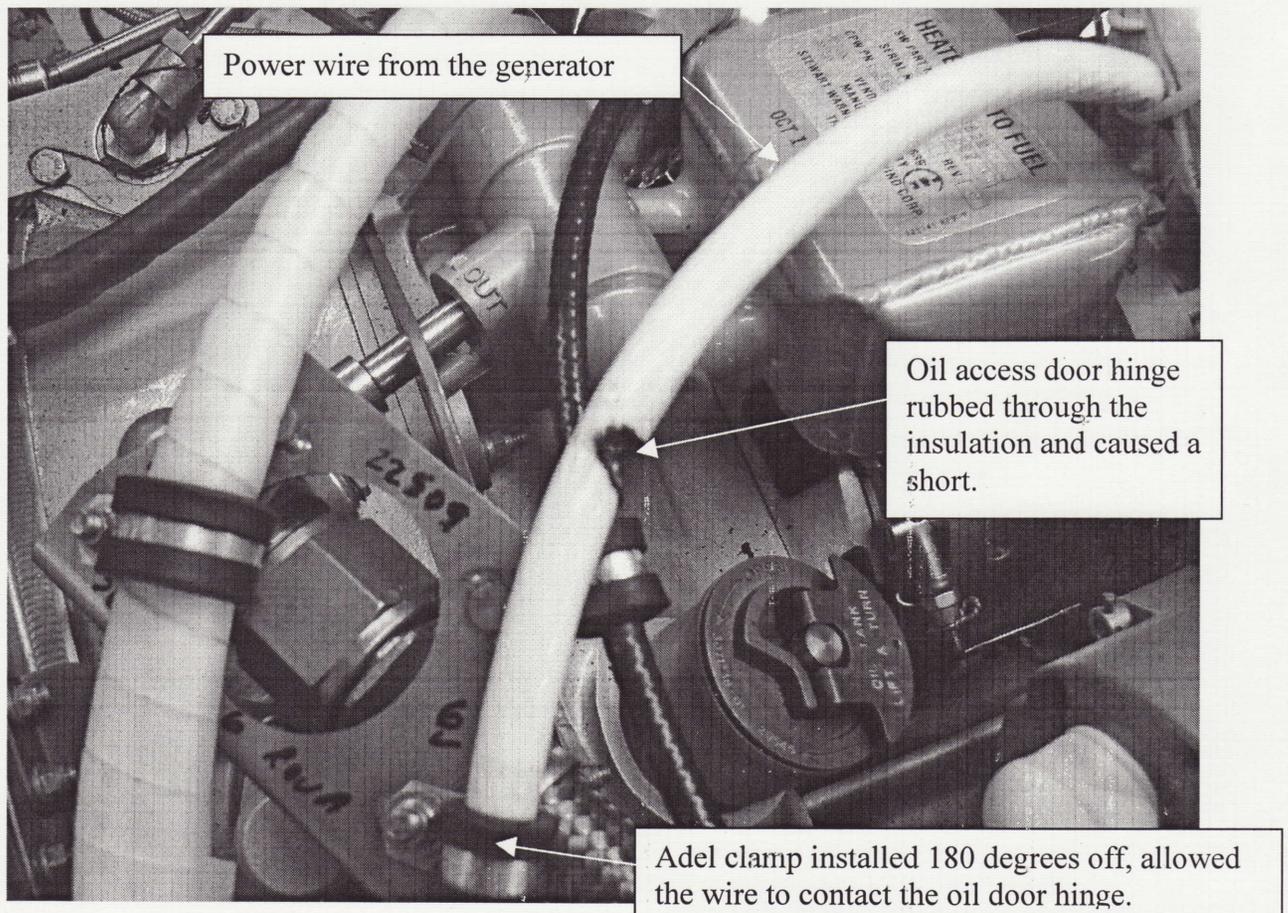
Improperly Routed Wire (Looking Down on the Accessory Gear Box Area)
